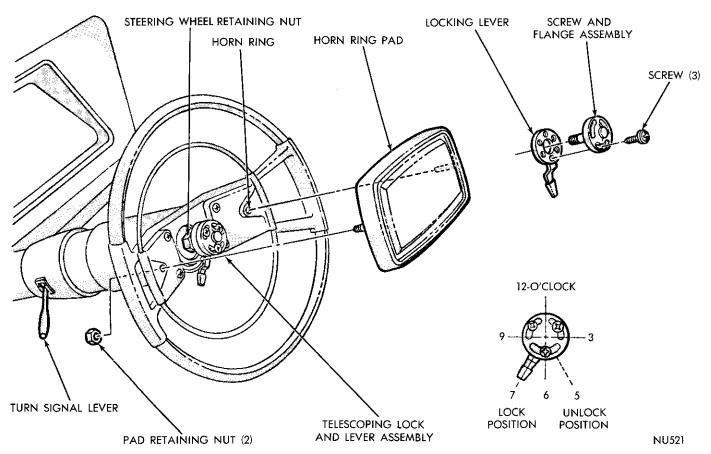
Telescoping Steering Wheel-Locking Mechanism
